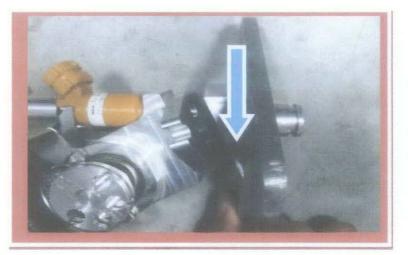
Slope extension using mild steel for straight fuel spray purpose
